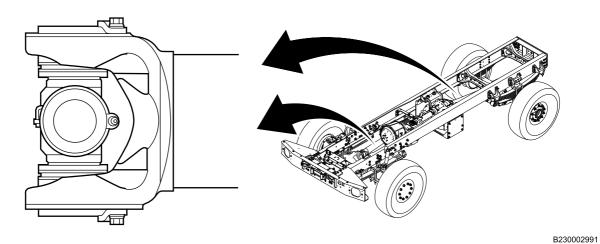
Front and Rear Propeller Shafts — Two Universals Each.
